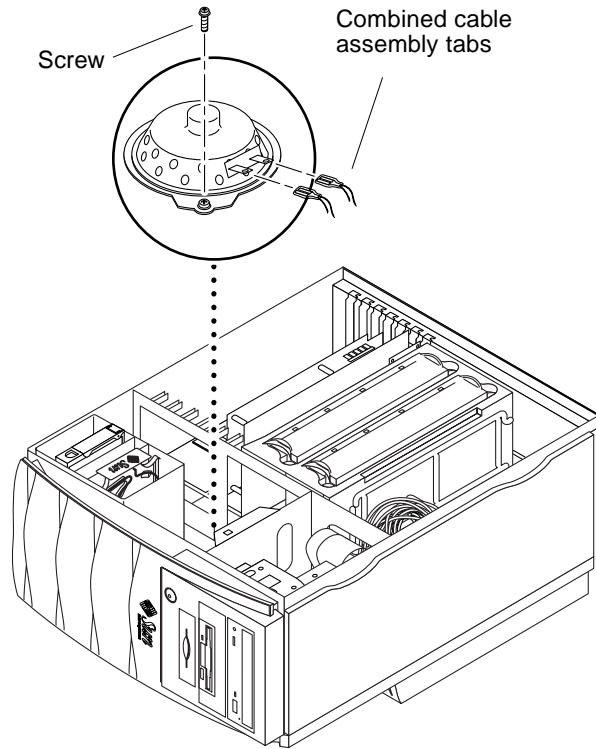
Removing and Replacing the Speaker Assembly
